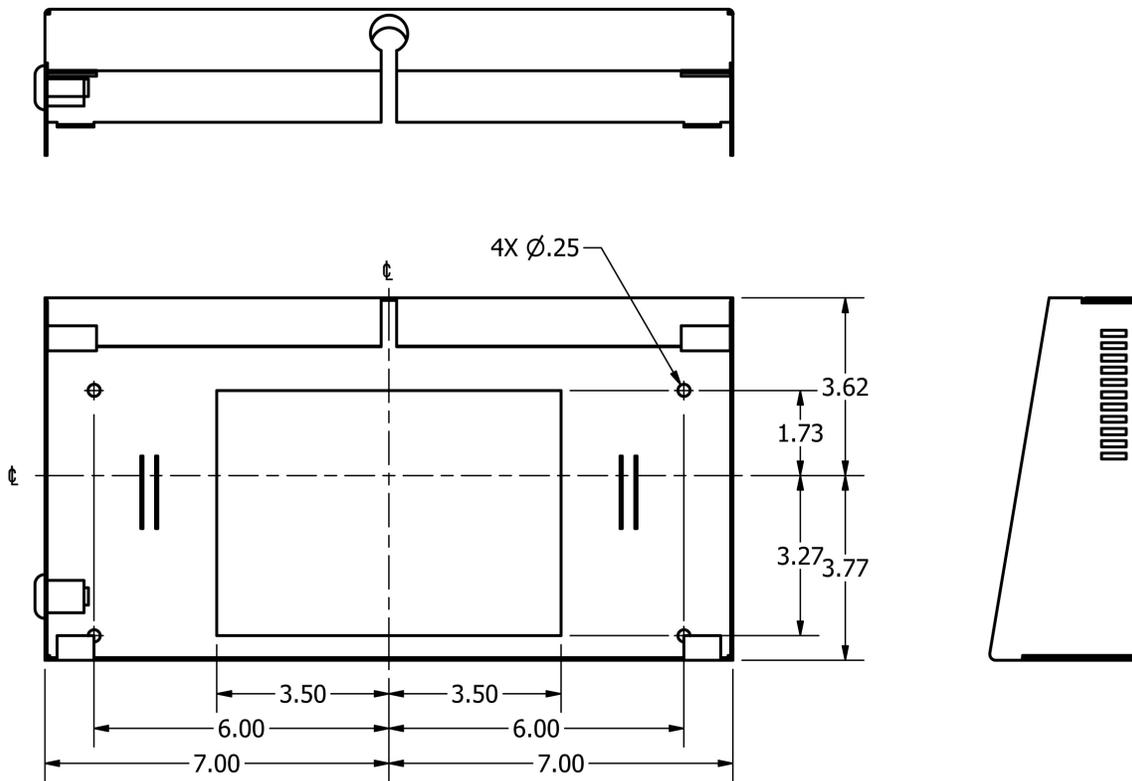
IRIS Tablet PC mounting bracket dimensions (inches)
